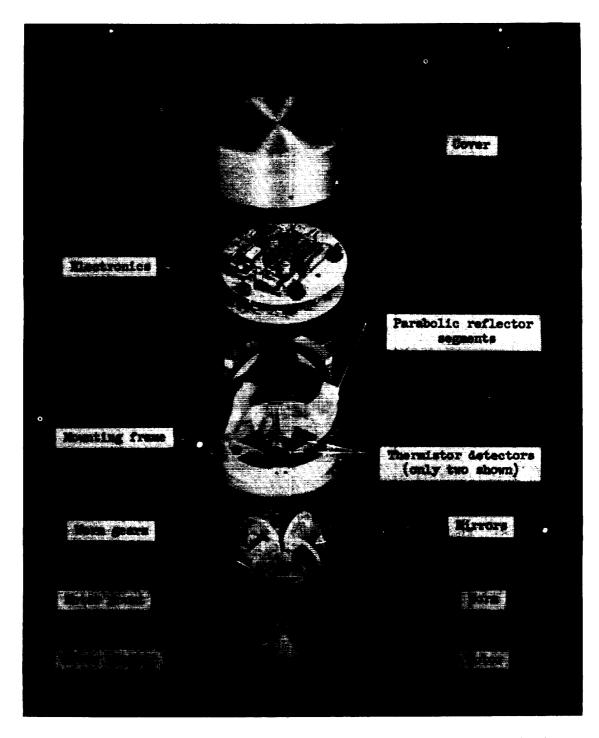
Exploded view of experimental sensor. L-60-6511.1
